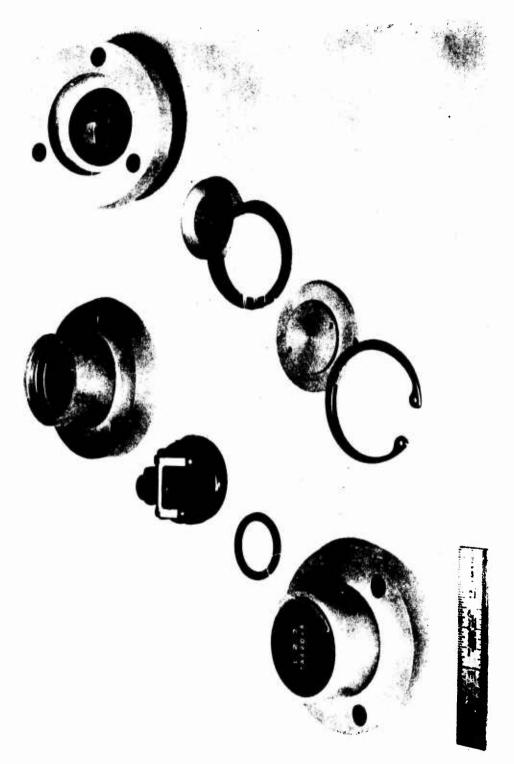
Accelerometer, Impedance Type, One Completely Assembled, a Second with Gauge Element Assembly Removed, and a Third with Oil Diaphragm Assembly Removed
